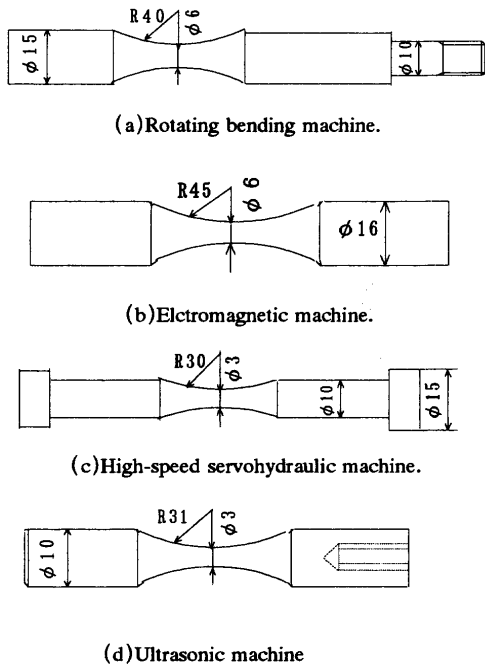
Profiles of fatigue testing specimens. Dimensions are in mm.
